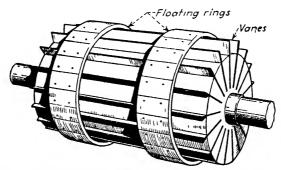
Floating rings prevent contact between vanes and cylinder.
